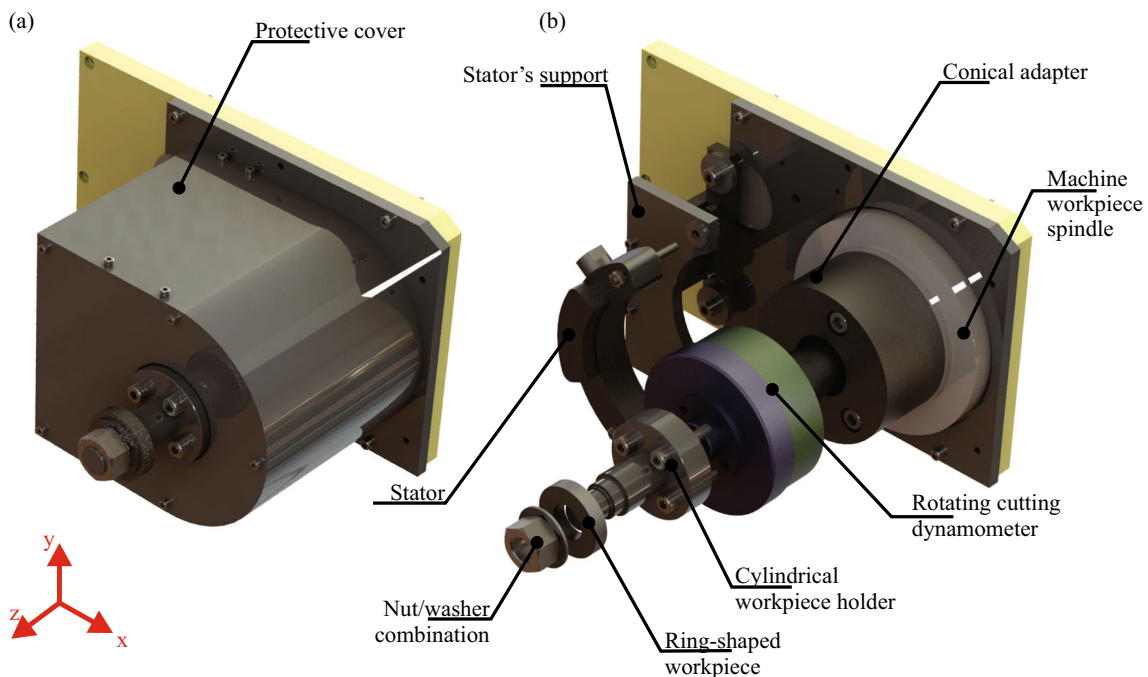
Force measuring system: assembly (a) and detailed exploded view (b)
